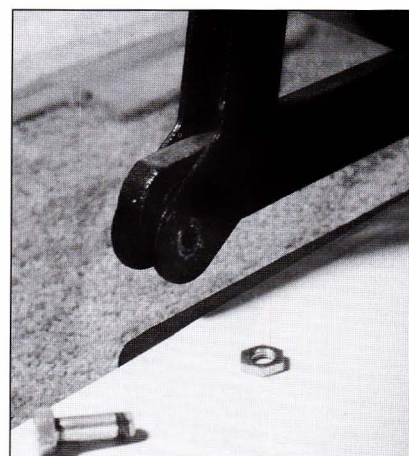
Remove the hex bolts and nuts on the lowest segment of the press arm mechanisms. Keep track of the order that you remove the parts so that you replace them correctly.
